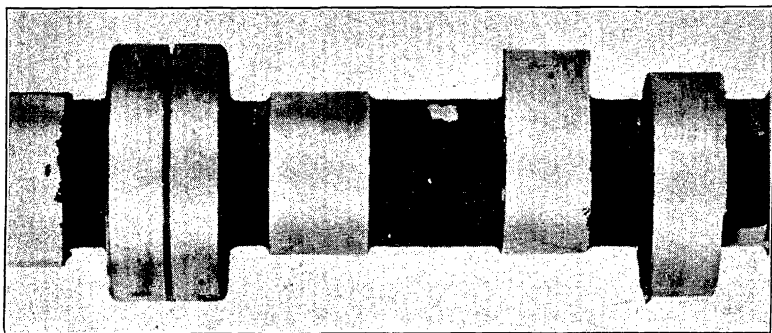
COPPERPLATED CAM SHAFT AS TAKEN FROM FURNACE.
